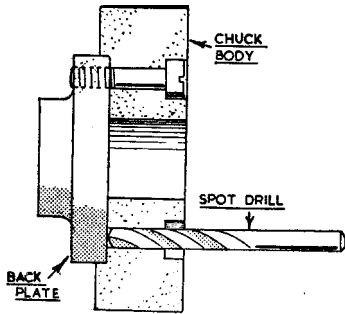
Showing a four-jaw chuck mounting and the method of marking the screw-hole centres
